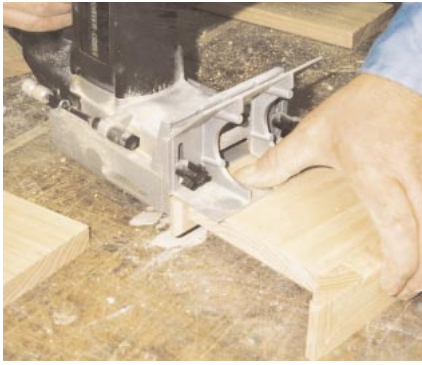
Once the head trim is assembled, the author biscuit-joins the side casings to the head piece. He clamps the pieces to a backer piece to make sure the back is perfectly flat.
